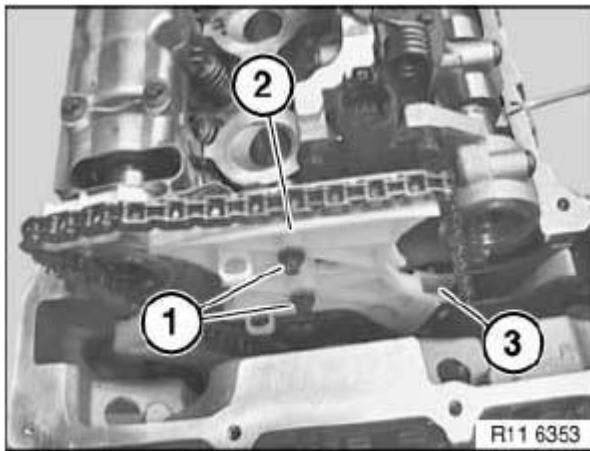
Identifying Engine Timing Chain Module, Junction And Screws
